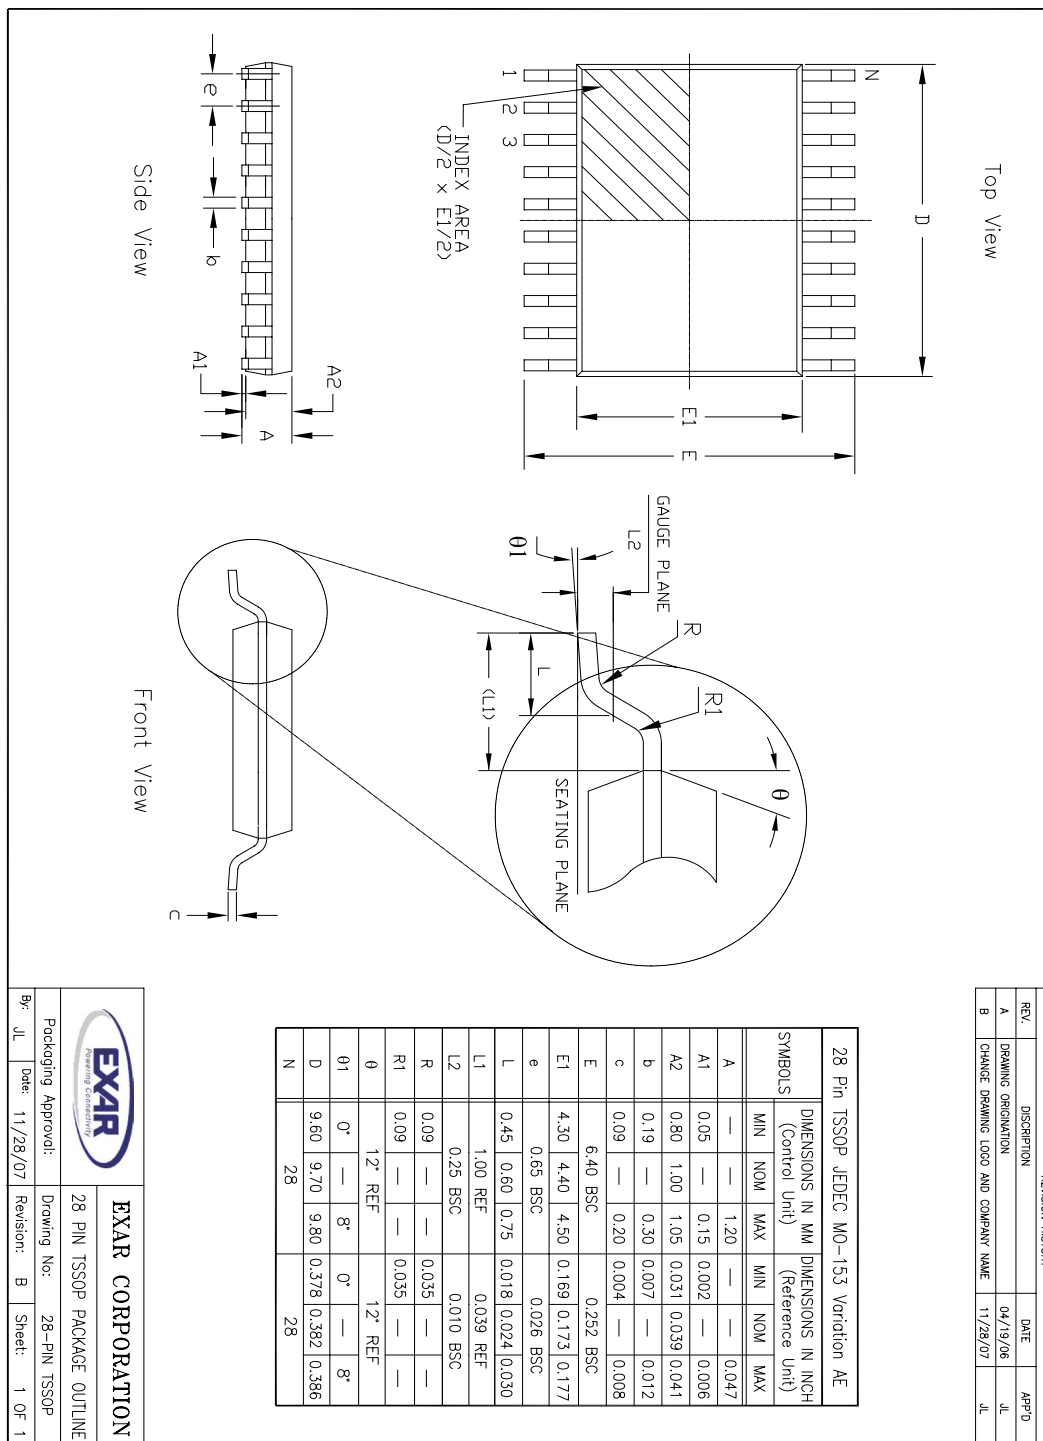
28 PIN TSSOP PACKAGE OUTLINE DRAWING
